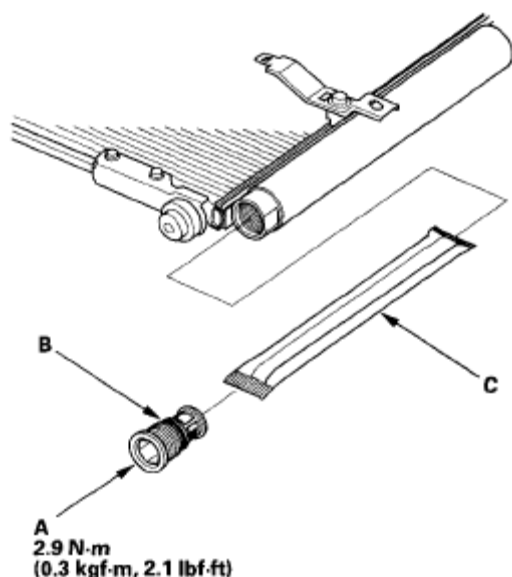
Removing O-Rings And Desiccant (With Specifications)
